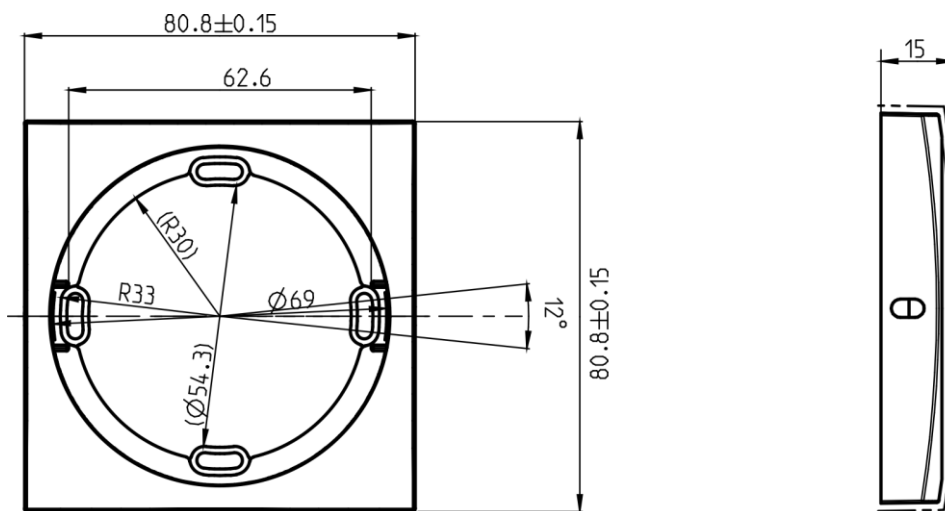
Dimensions sheet for frame (top-down view and side view)
